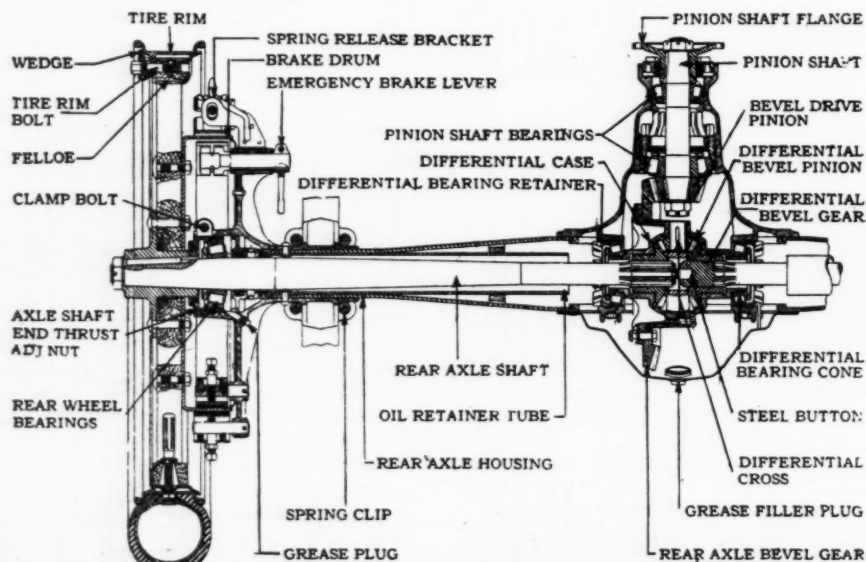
Adjustments for bevel drive pinion and ring gear on Studebaker
